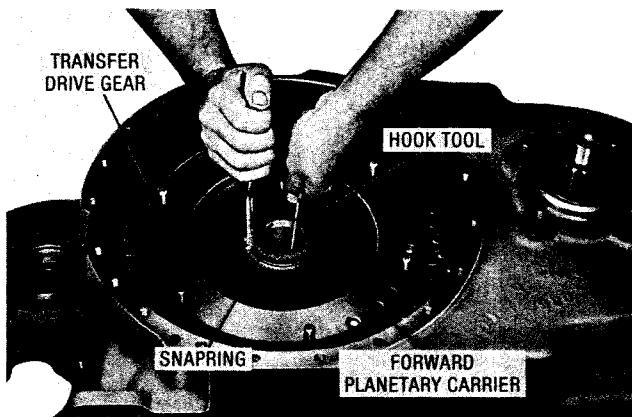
Installing transfer drive gear snapping (TT, TTB)
